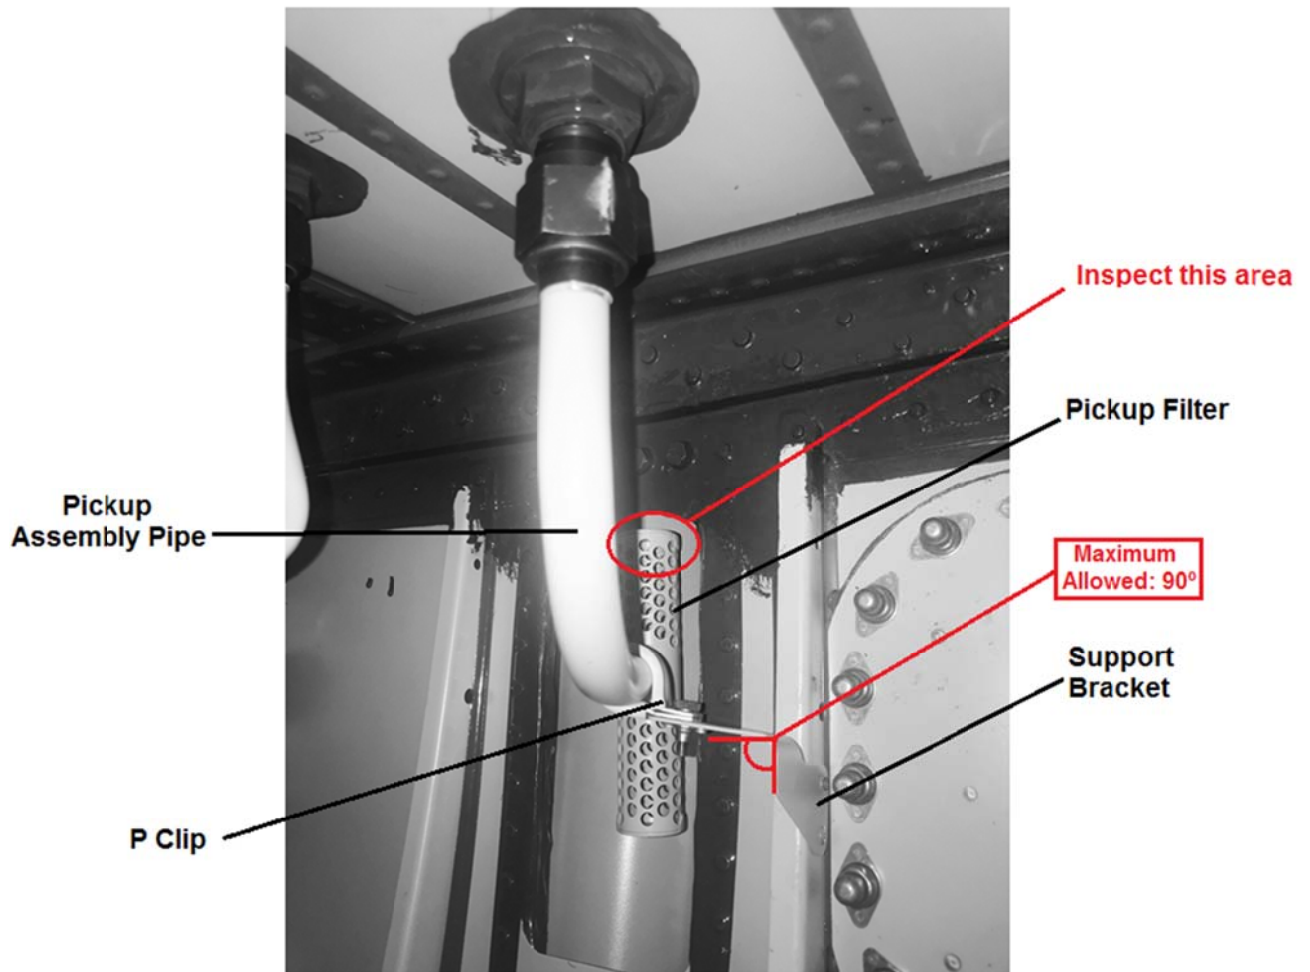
INSPECTION AREA – LH WING VIEW (RH WING VIEW IS OPPOSITE SIDE)
